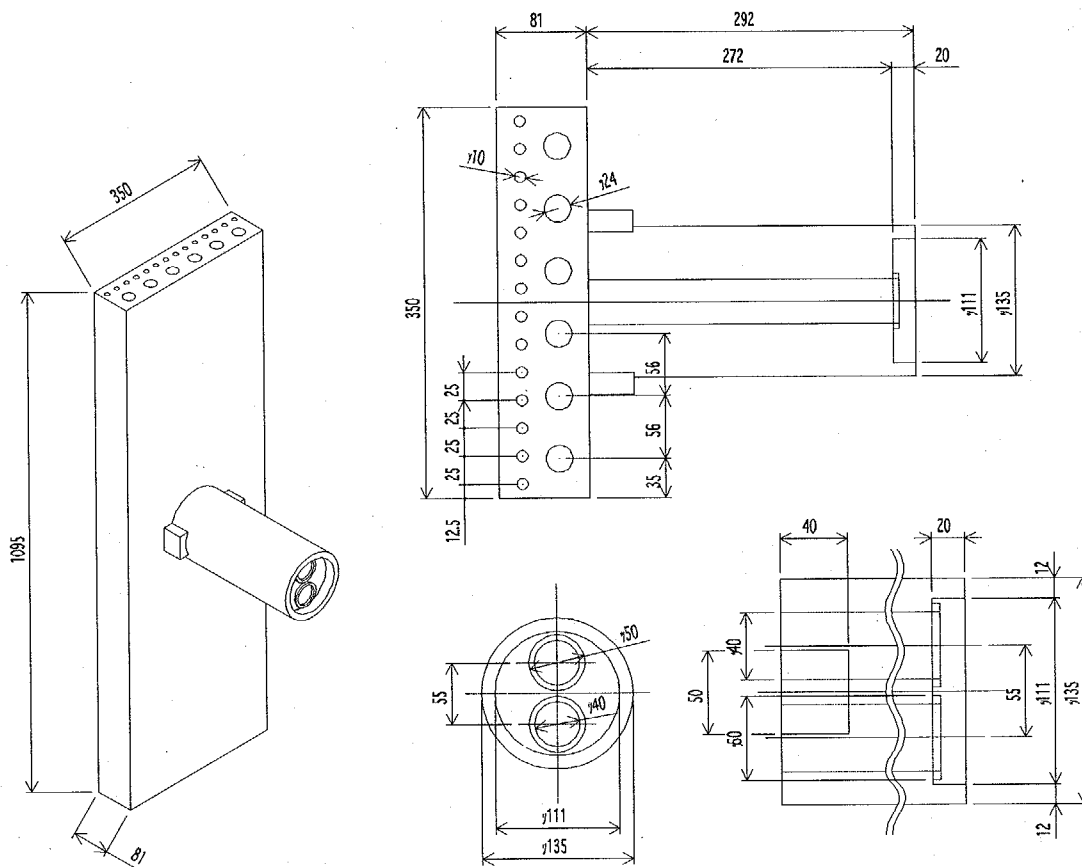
FW supporting beam (circular welding, beam length 292 mm)
